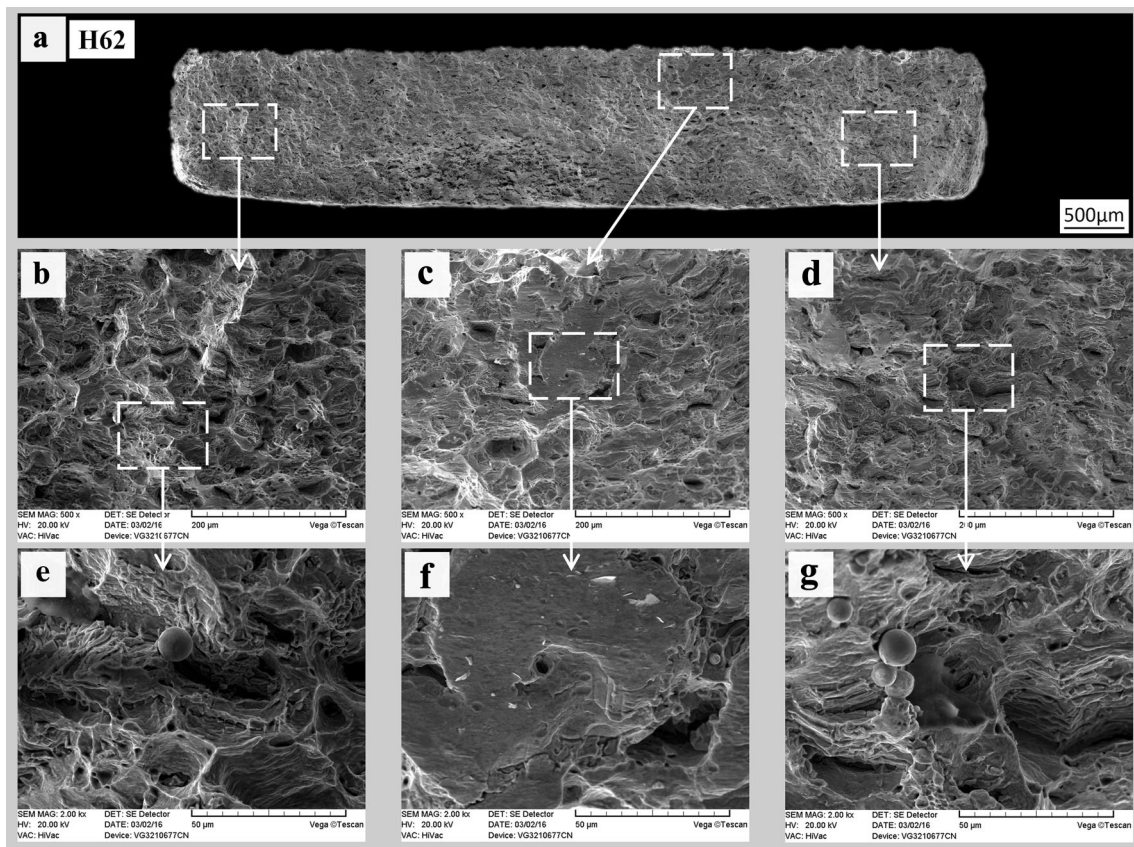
Fractography of the layer 1# (H62) after the tensile test
